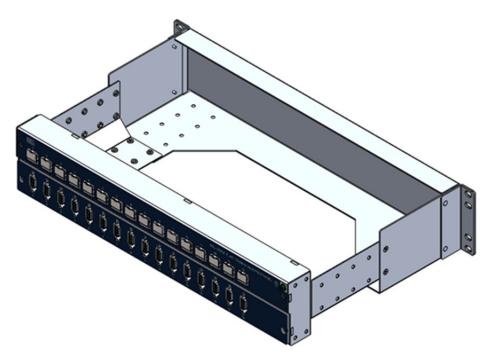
Adjustable Rack Mount Configured to Depth of 11 Inches
